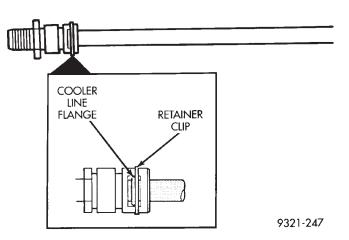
Verifying Installation Of Cooler Lines In Quick Disconnect Fittings
